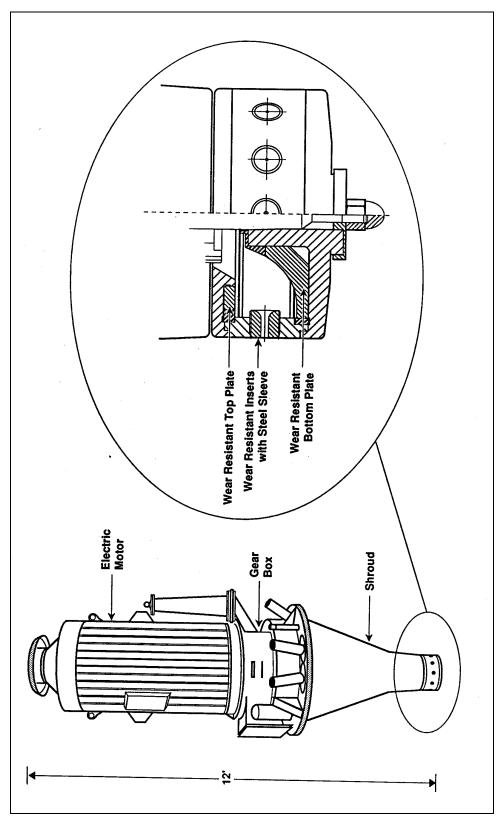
Rotary Atomizer Drive and Wheel Assembly
